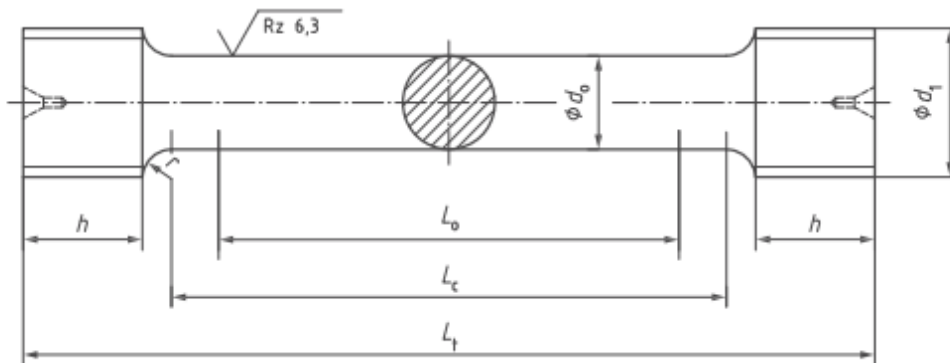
Example of cylindrical tensile test machined specimen, UNI EN ISO 689202.
